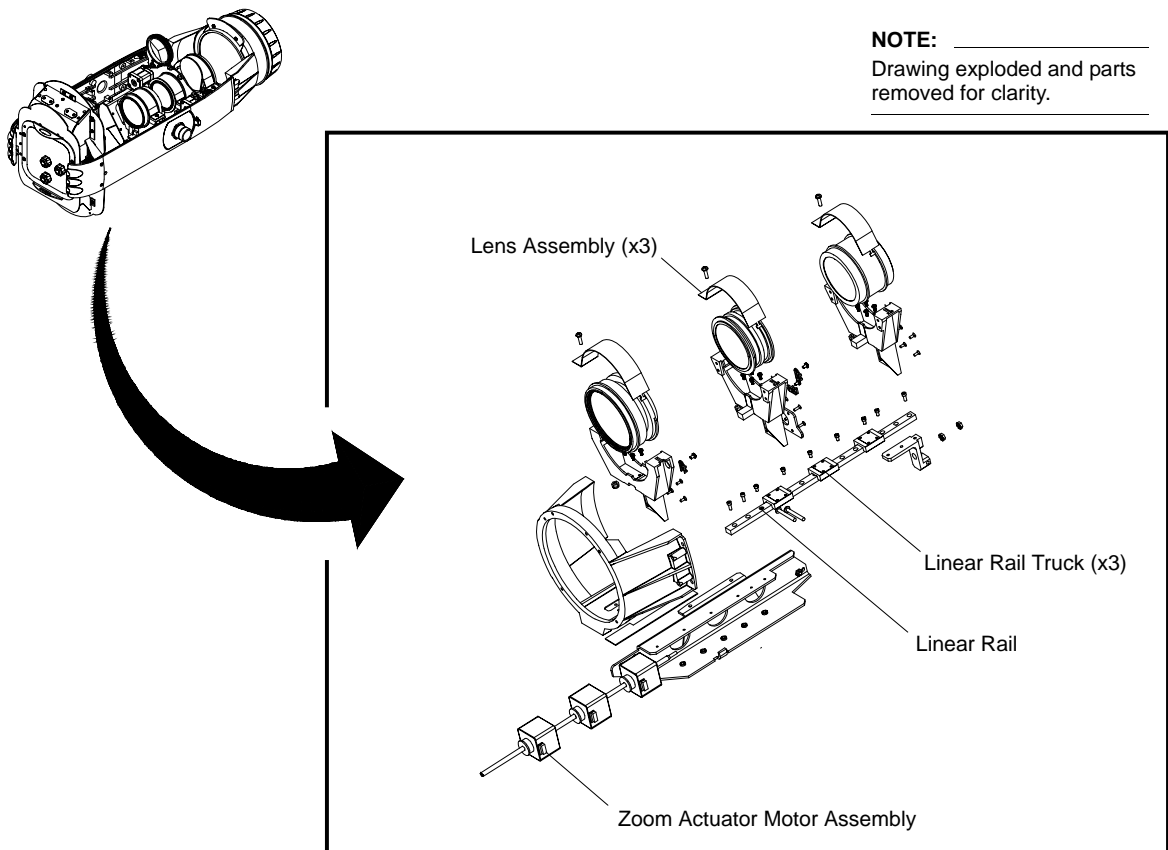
Zoom Optics - Zoom (Actuator) Motor Replacement
